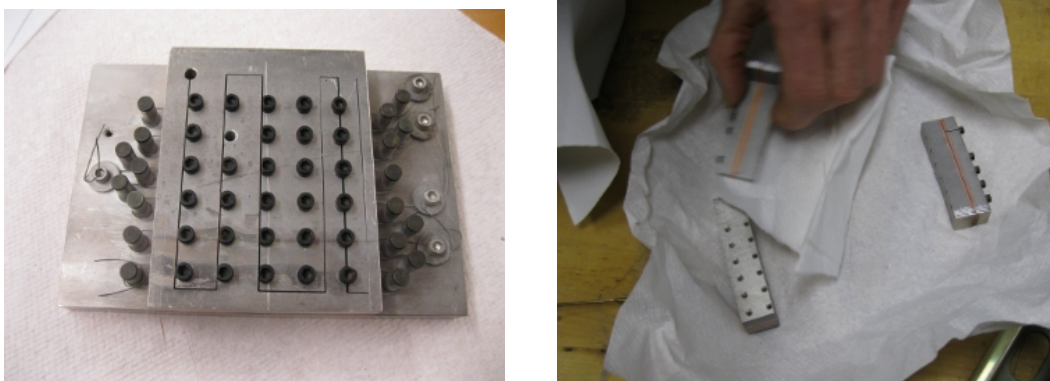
Prototype cutting jig submitted to Wire Works Engineering after the cutting job was performed. Left: Jig as returned by the shop. A mistake in the programming of the EDM apparatus resulted in the cut path passing through the centers of one row of screws. Right: Jig after being cut into sections at UW in preparation for disassembly and recovery of cut wire pieces.
